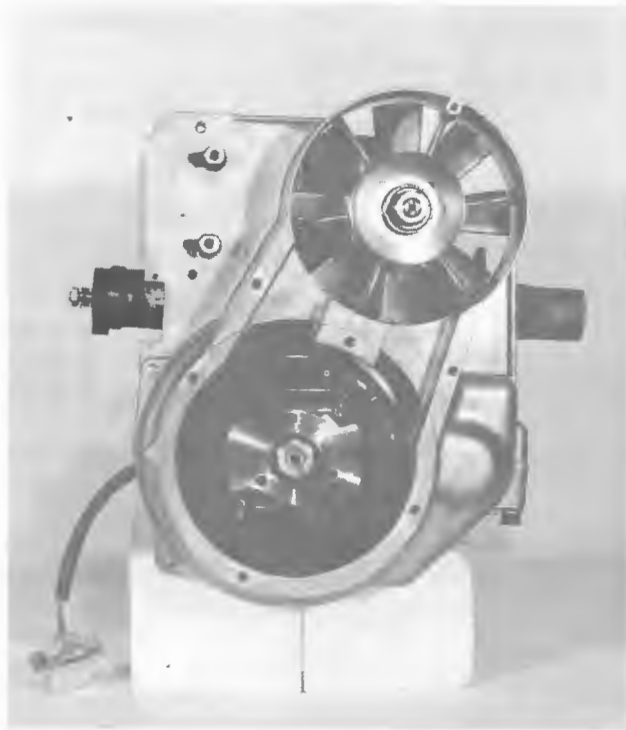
STARTER CAP AND FAN BELT REMOVED
